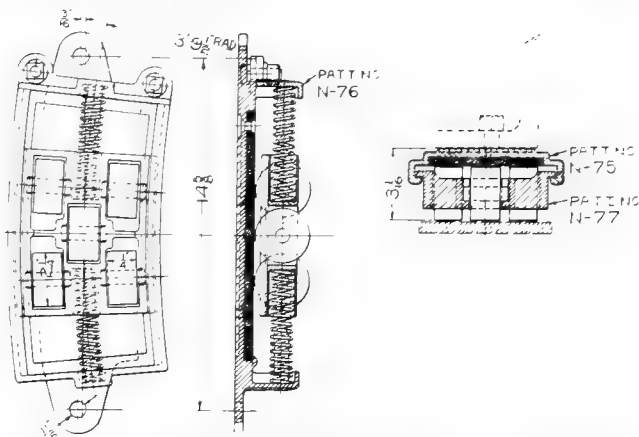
Drexel Five-Roller Side Bearing for Passenger Service.
